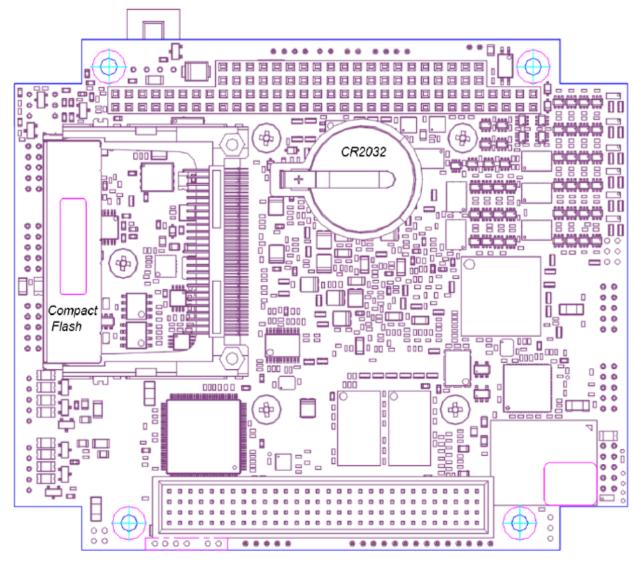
Location of the main elements of the device on the bottom side of the board
